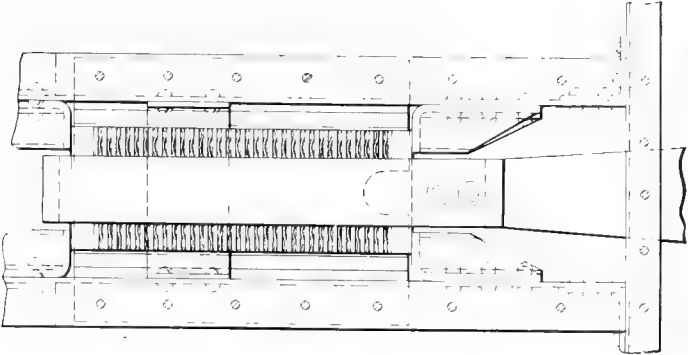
Slick Friction Draft Gear. Cambria Steel Company.
